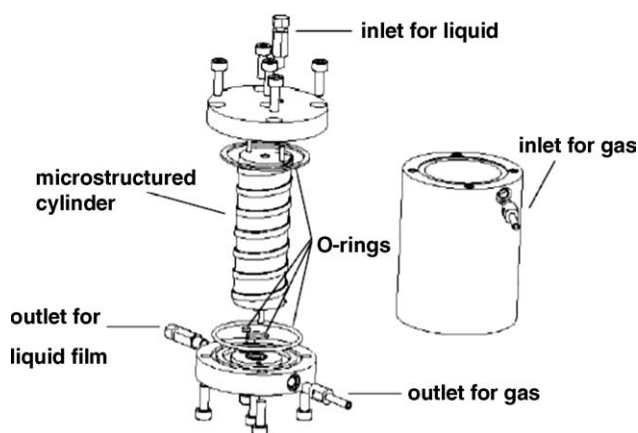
CAD drawing showing the principle of assembly and guiding of gas and liquid flows.
